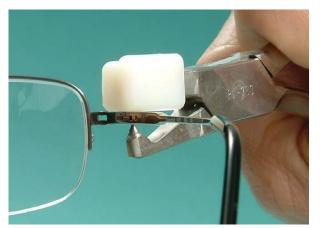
Flaring pliers will flare a rivet or screw tip to prevent it from backing out.
